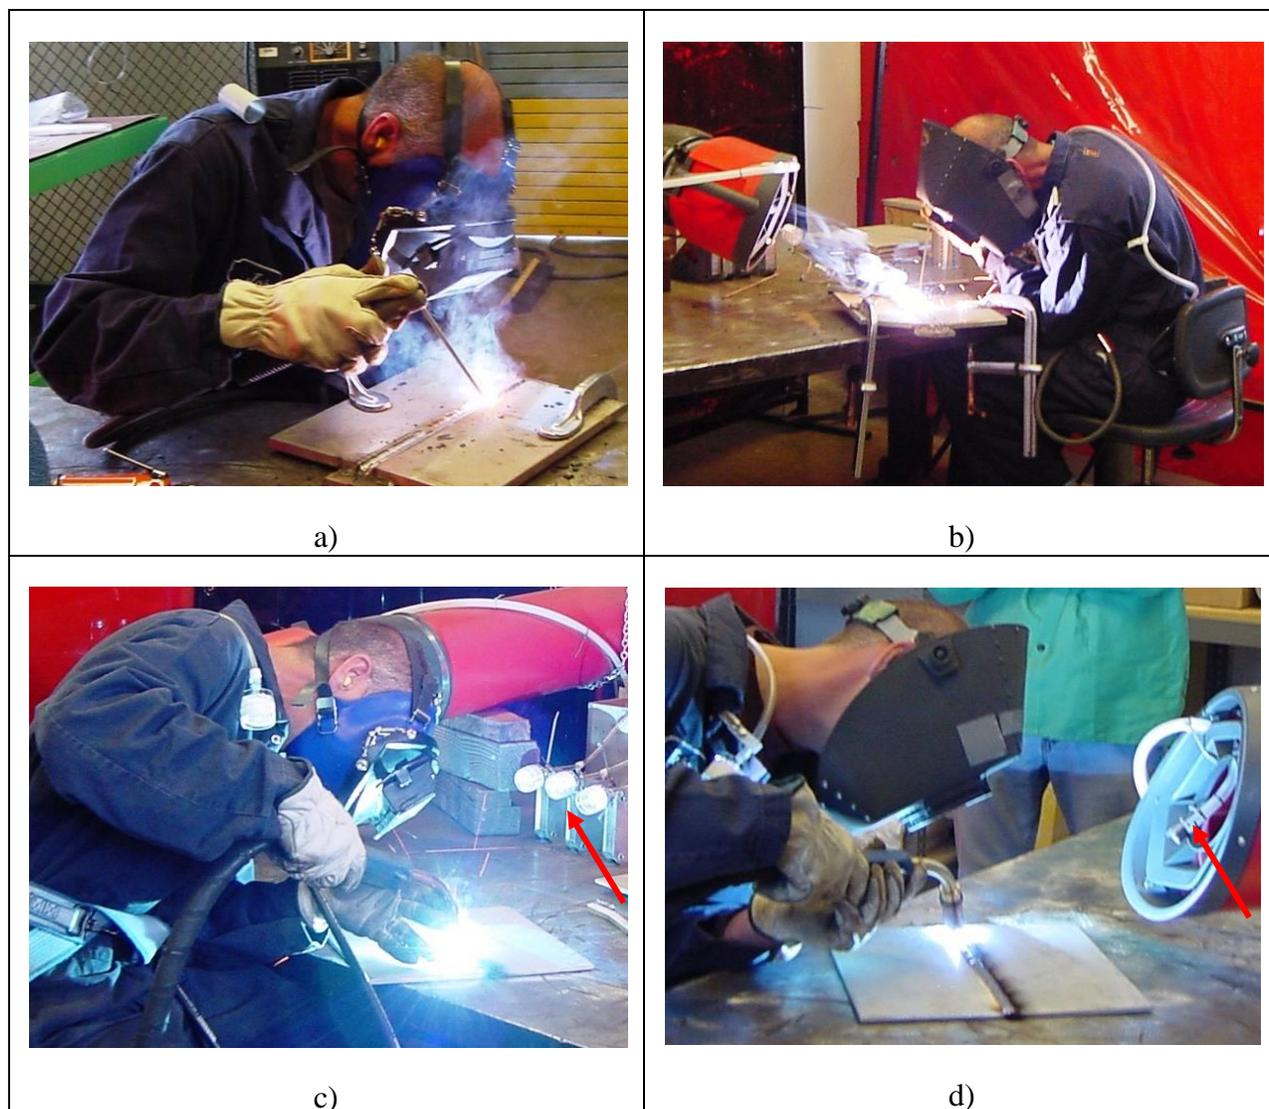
Field Demonstration Welding Processes: a) SMAW with Cr-free ENiCuRu Electrode, b) SMAW with Baseline E308L-16 Electrode; c) GMAW with Cr-free ERNiCuRu Filler Wire (IH pumps pointed by a red arrow); d) GMAW with Baseline ER308LSi Filler Wire (AS and ELPI sampling tubes pointed by a red arrow)
